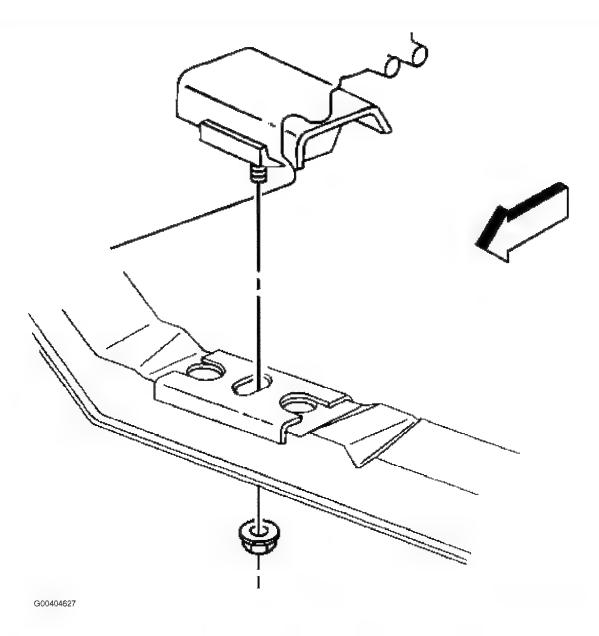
Removing/Installing Rear Engine Mount-To-Transmission Support Nut Courtesy of GENERAL MOTORS CORP.
